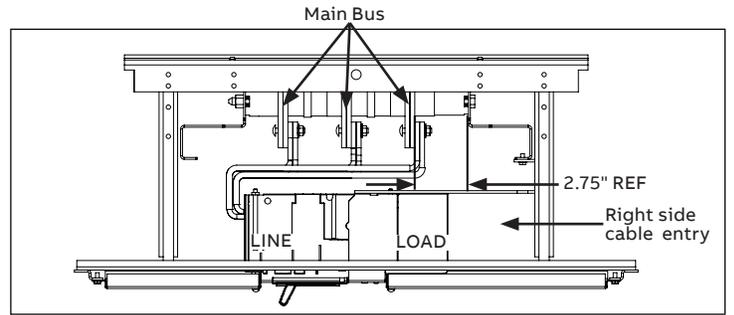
Single Branch, ABB XT5; Right side cable entry, Assembly end view
